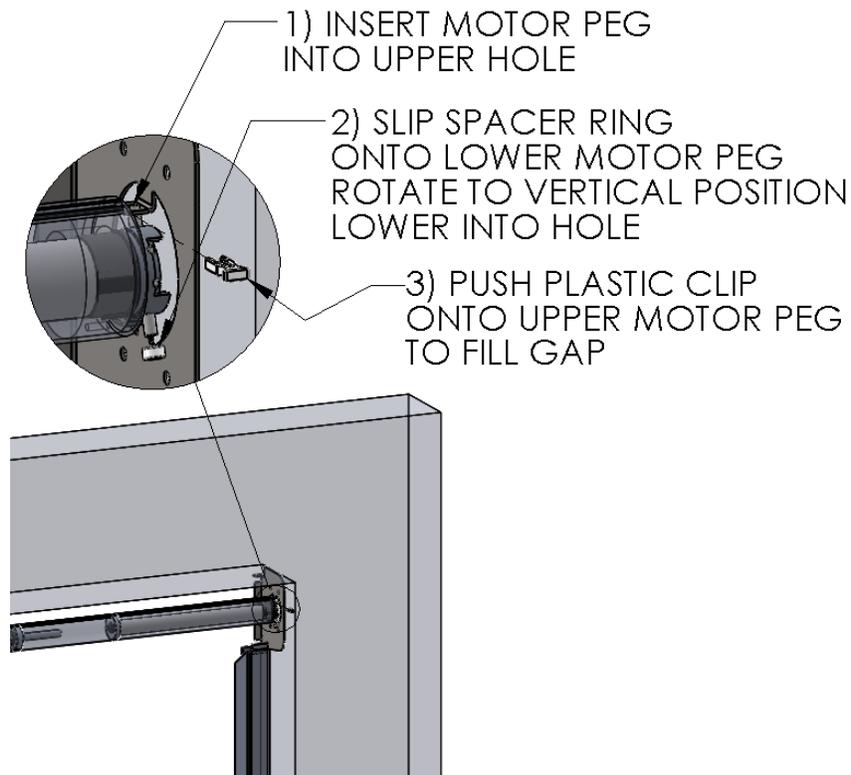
INSTALL MOTOR SIDE OF ROLL ASSEMBLY
